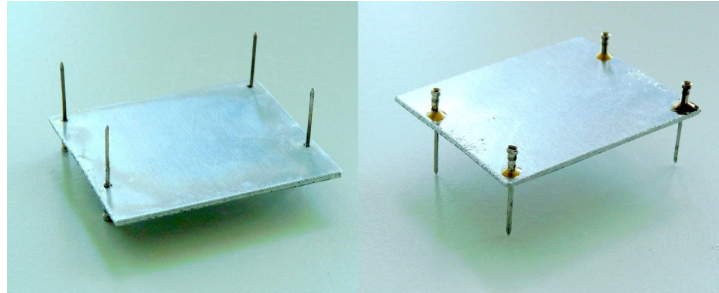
Top (left) and bottom view (right) of the first alignment tool built with aluminium sheet support
